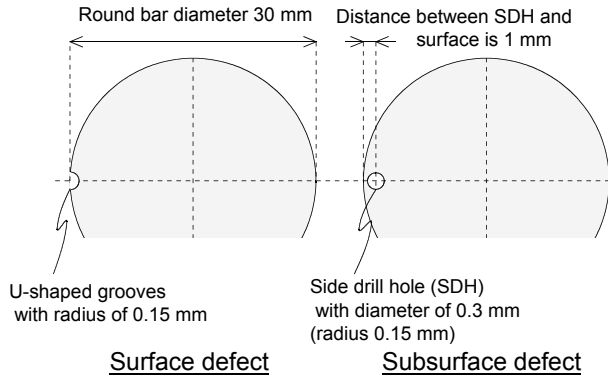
Artificial defects in U-shaped grooves and side drill hole.
